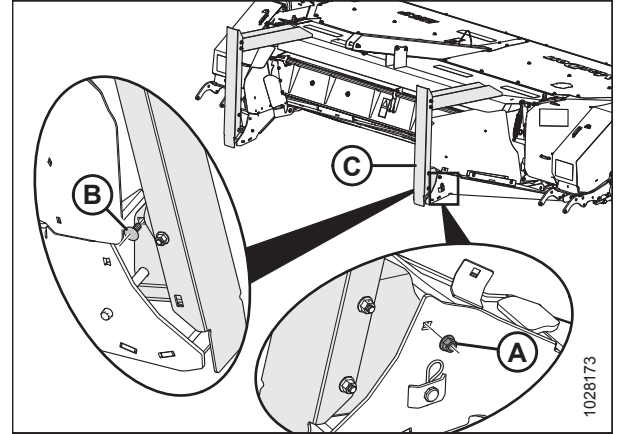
Shipping Stand – Right Side Shown, Left Side Opposite
